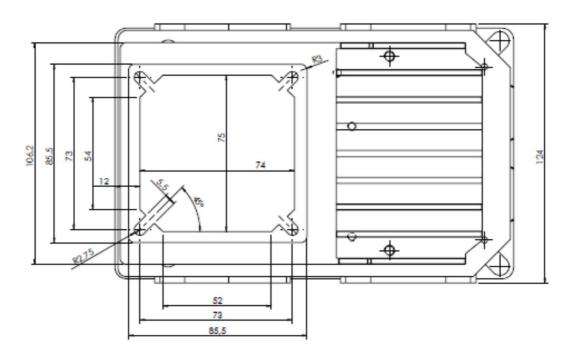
Fixing dimensions for IMTP(D)2.2M – ITTP(D)2.2M fixing type M80
